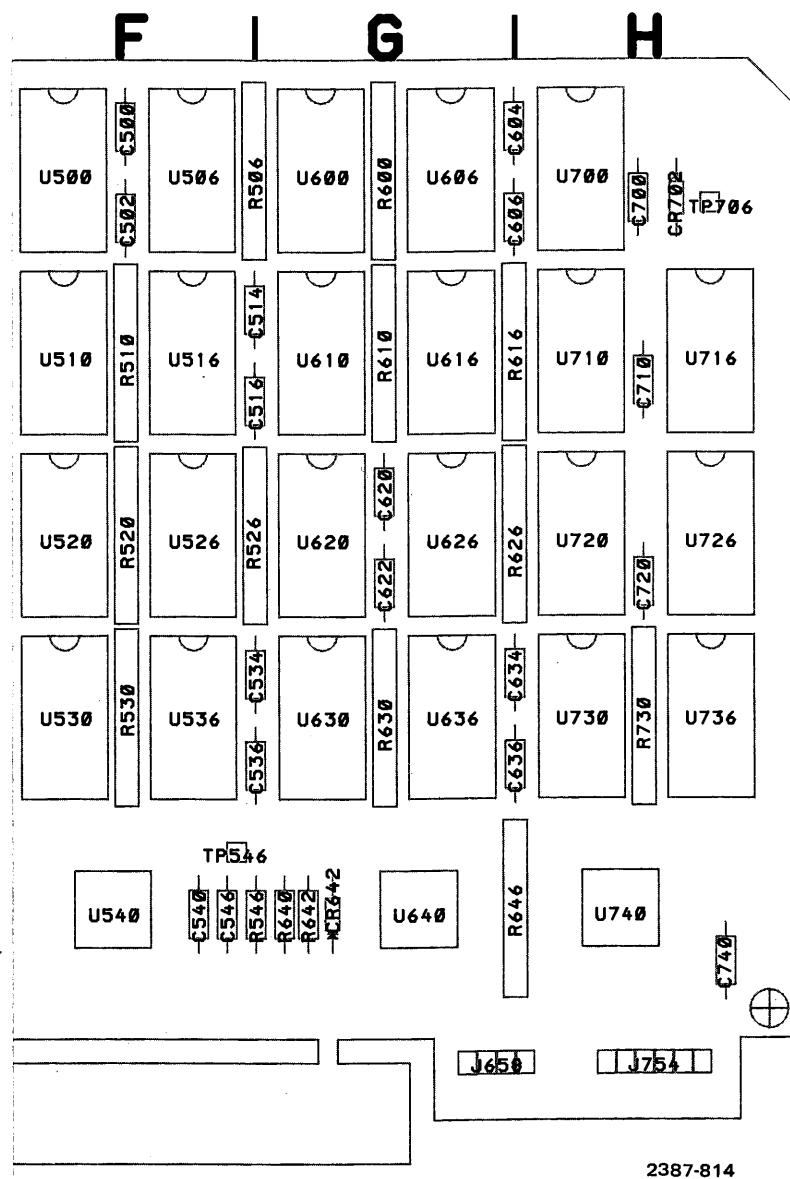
A. Timebase circuit board, assembly A20 (SN B030707 & below).
